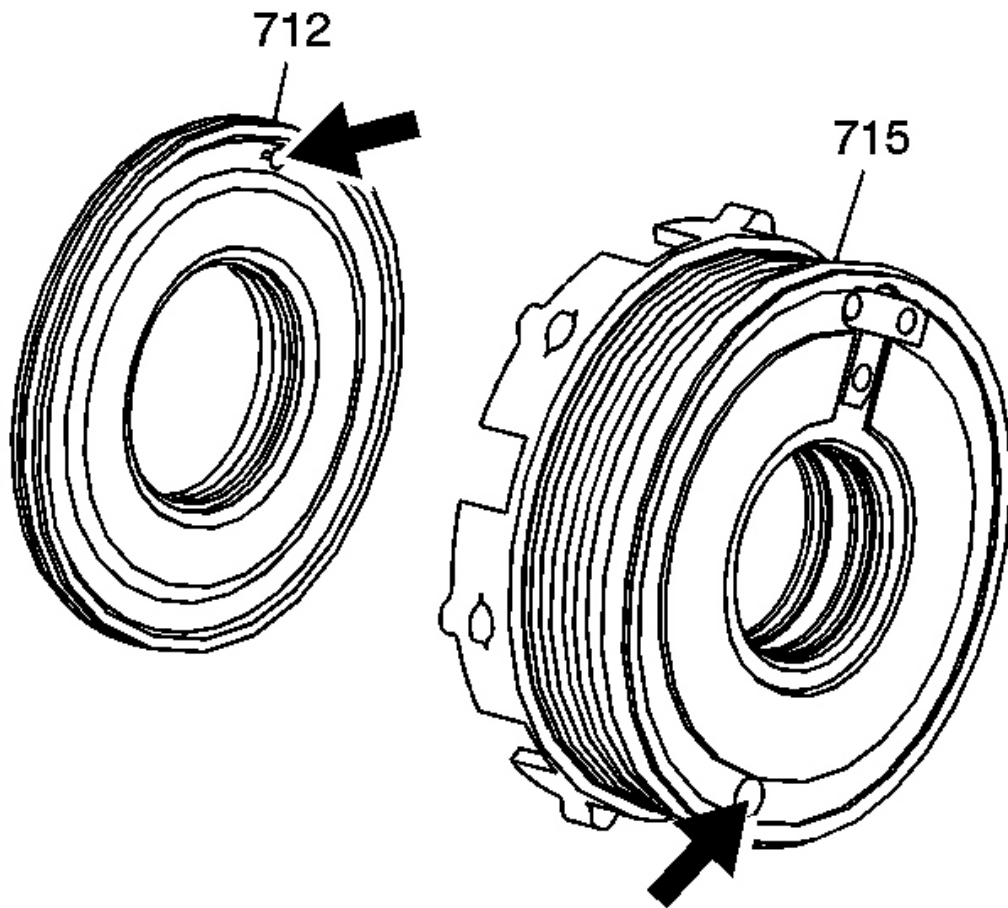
Inspecting The 1st Clutch & Coast Clutch
